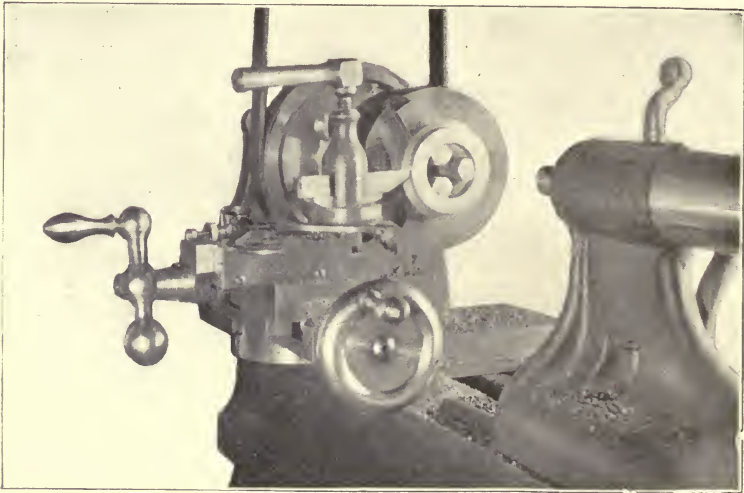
FINISHING INSIDE OF PISTON PACKING RING.
